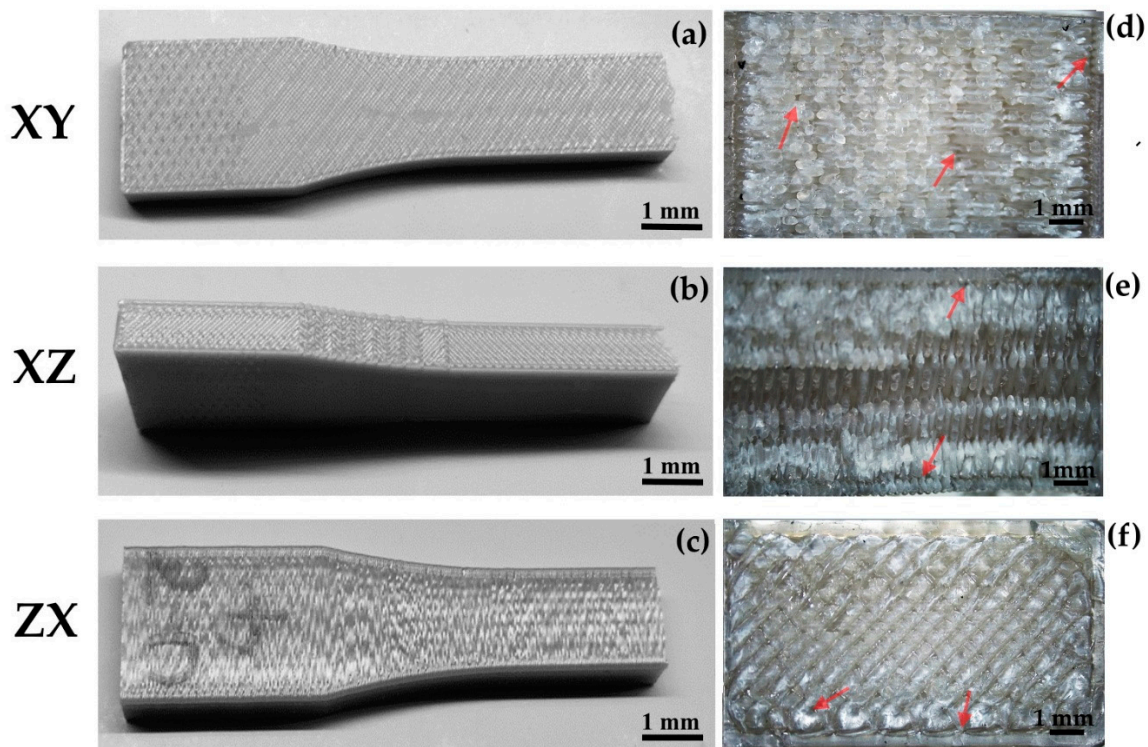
Samples built in XY, XZ, and ZX building directions after tensile tests. Macroscopic views of samples (a–c) and fracture surfaces (d–f).
